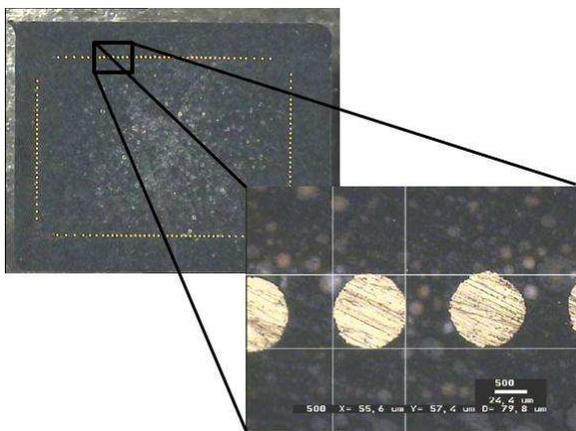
Gold bond heads embedded in mold compound after micro milling exposure
